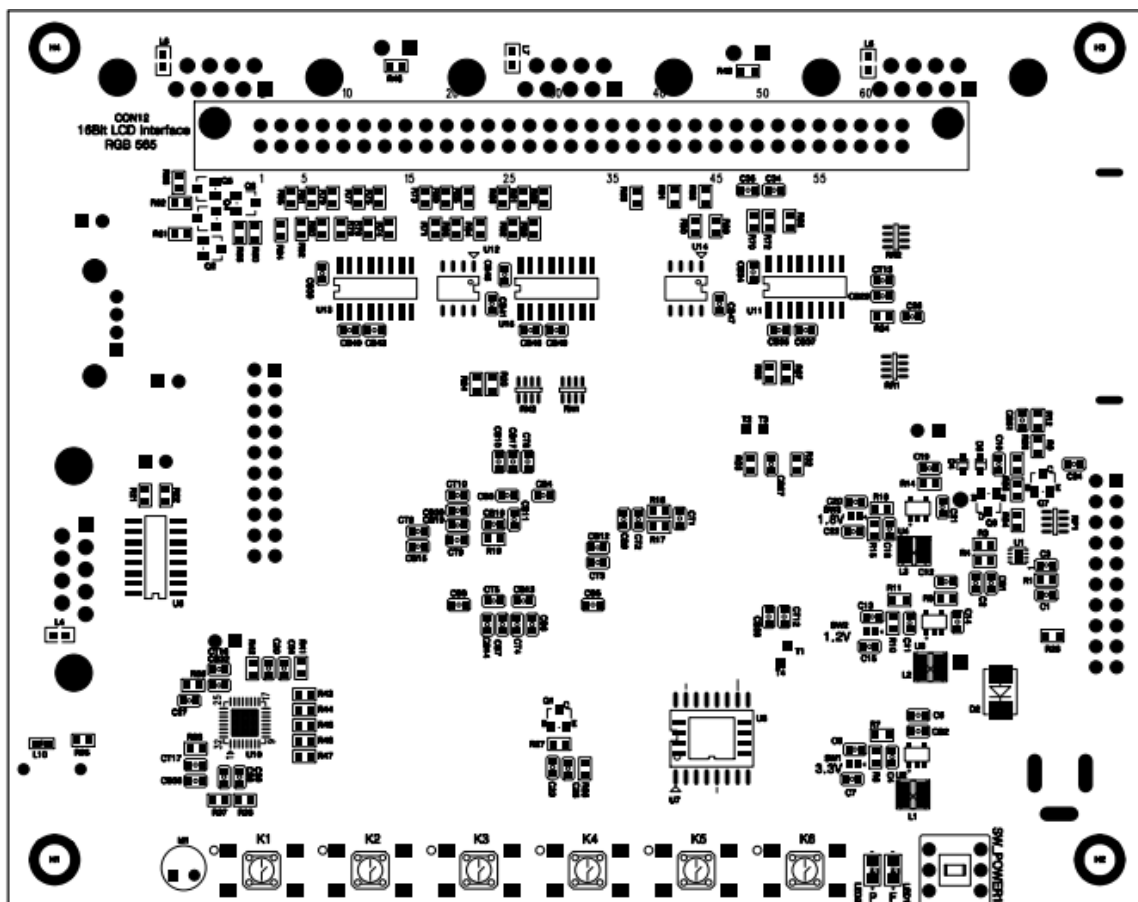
NuDesign-HMI-N9H30 Front PCB Placement
